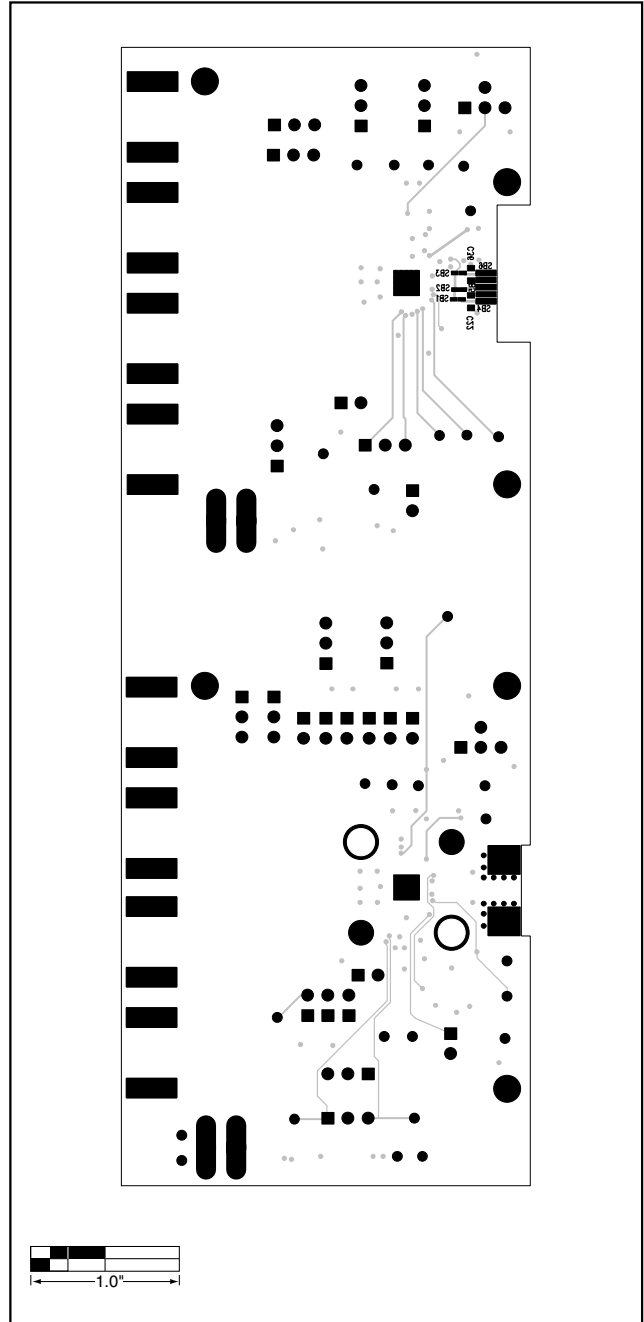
MAX3863 EV Kit PC Board Layout—Solder Side
